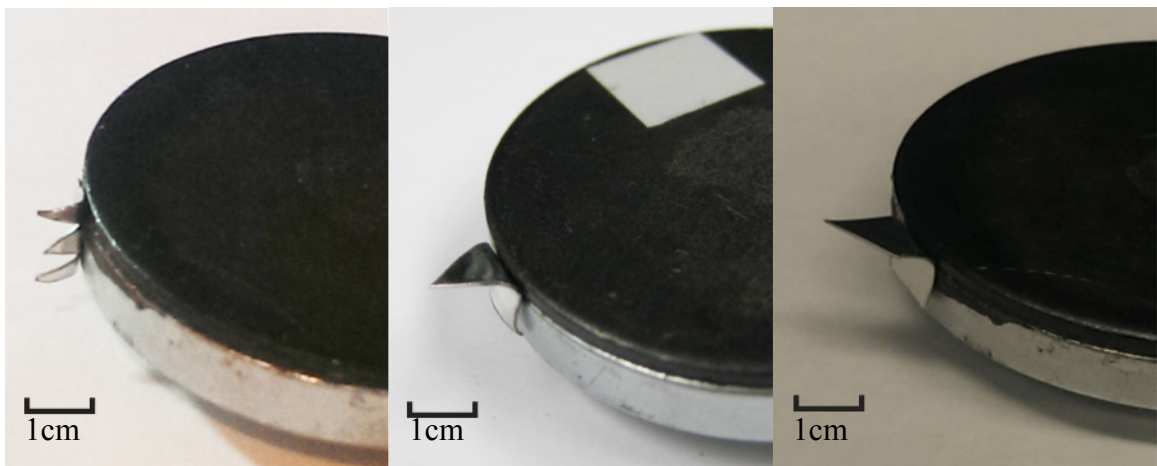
Different Sharp Tip and Rack Angle Design for Cutting Tool
